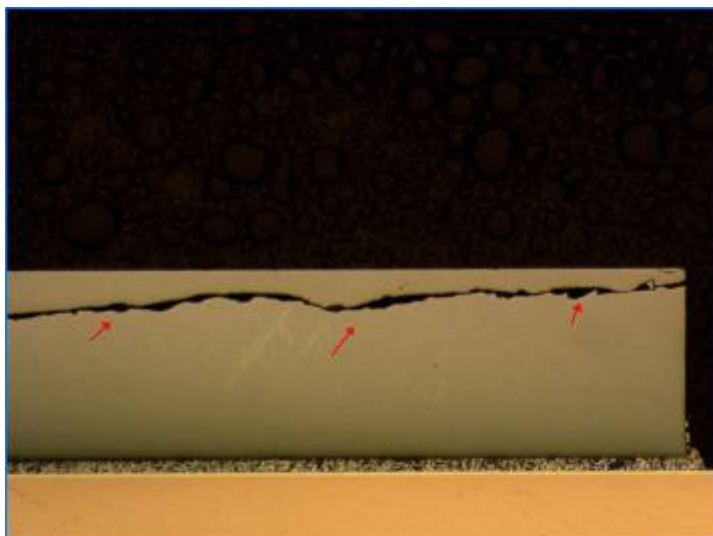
cross section, SN79, U28, comp top crack, 100xb
